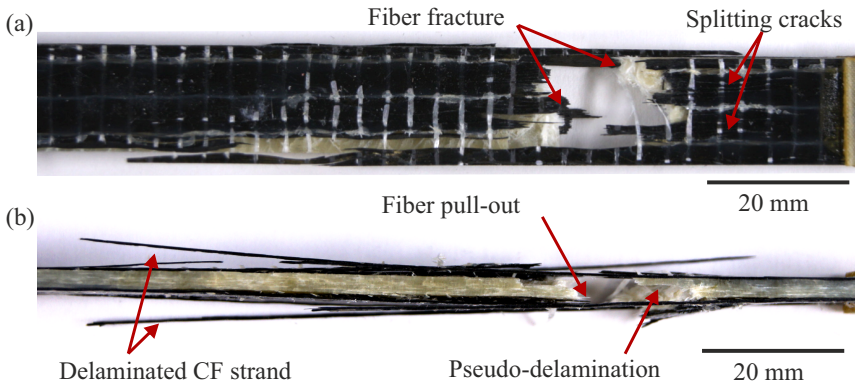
(a) Topview and (b) sideview of a CoDiCo SMC specimen tested at 85 % UTS^F after fatigue failure.
